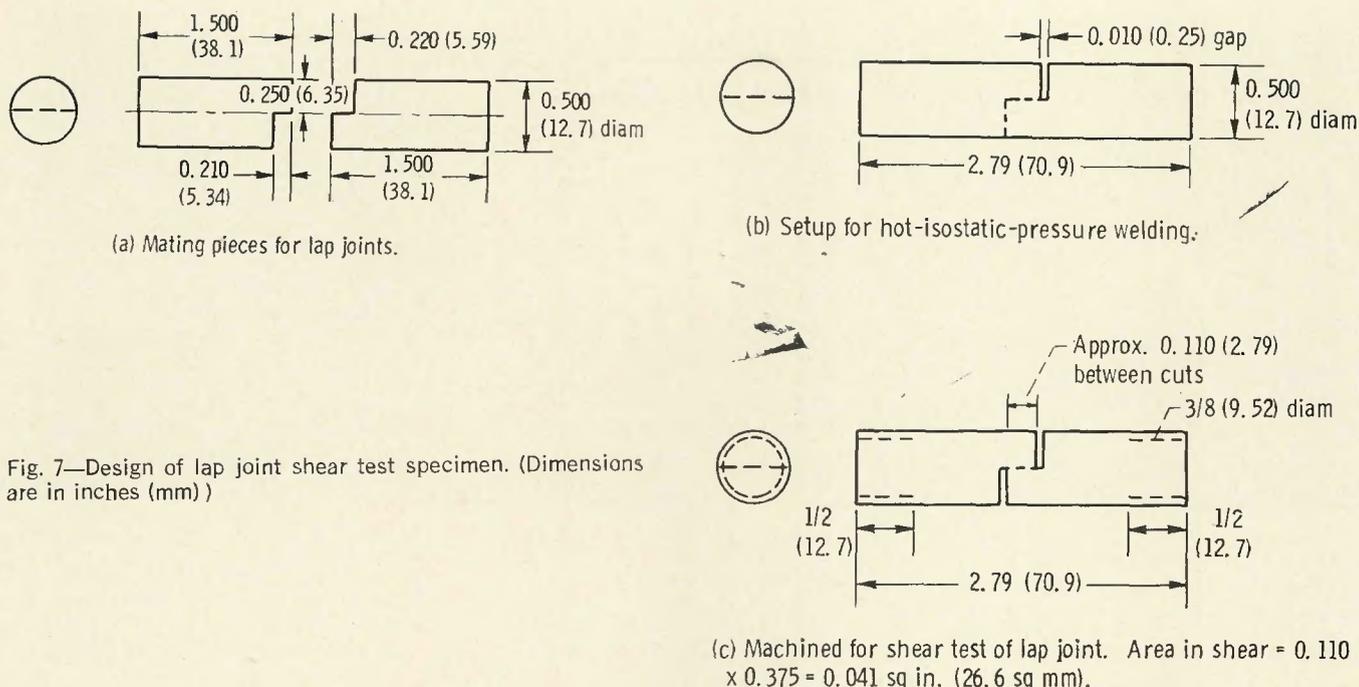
Design of lap joint shear test specimen. (Dimensions are in inches (mm))
